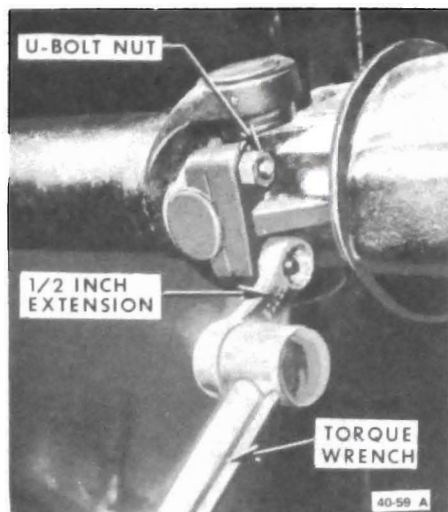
Using Extension to Torque U-Bolt Nuts.
